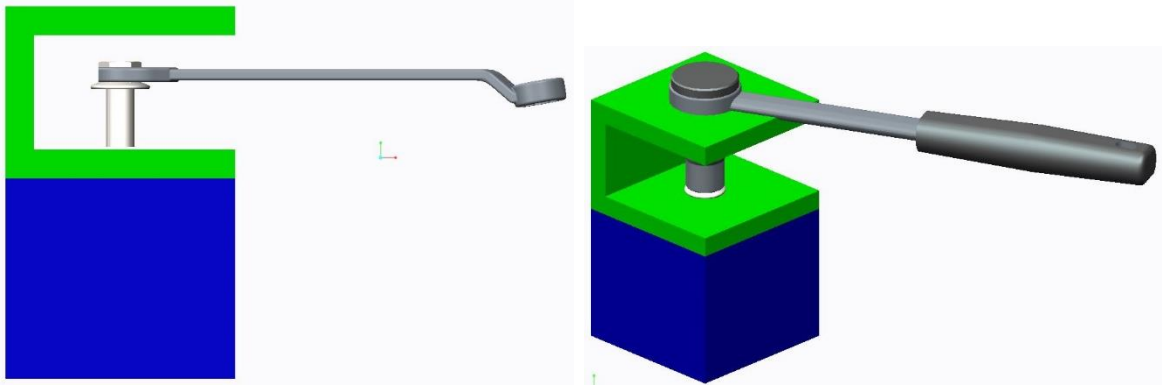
presents a top blockage of 40 mm. In this scenario it is feasible to remove the fastener with a regular wrench, but it is not possible to remove it with a ratcheting wrench with socket.
